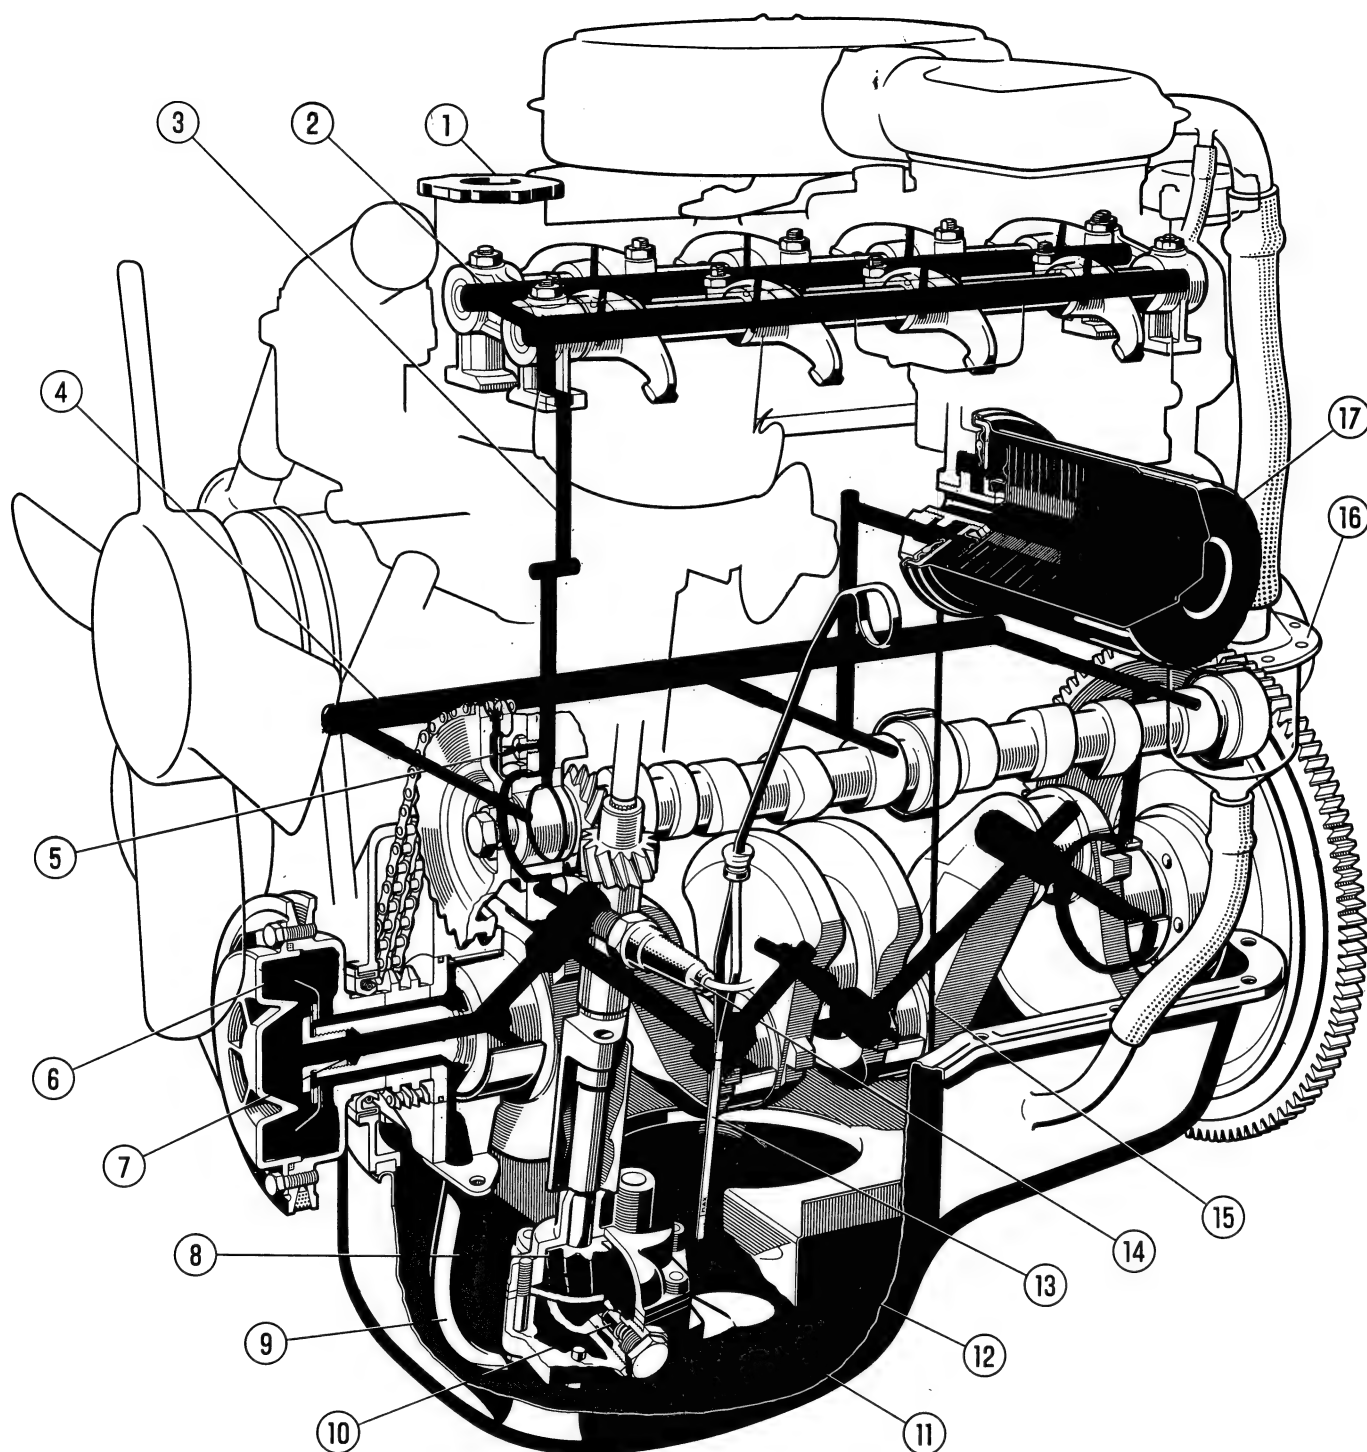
Cut-away and phantom view of 115 C.005 engine lubrication system.
